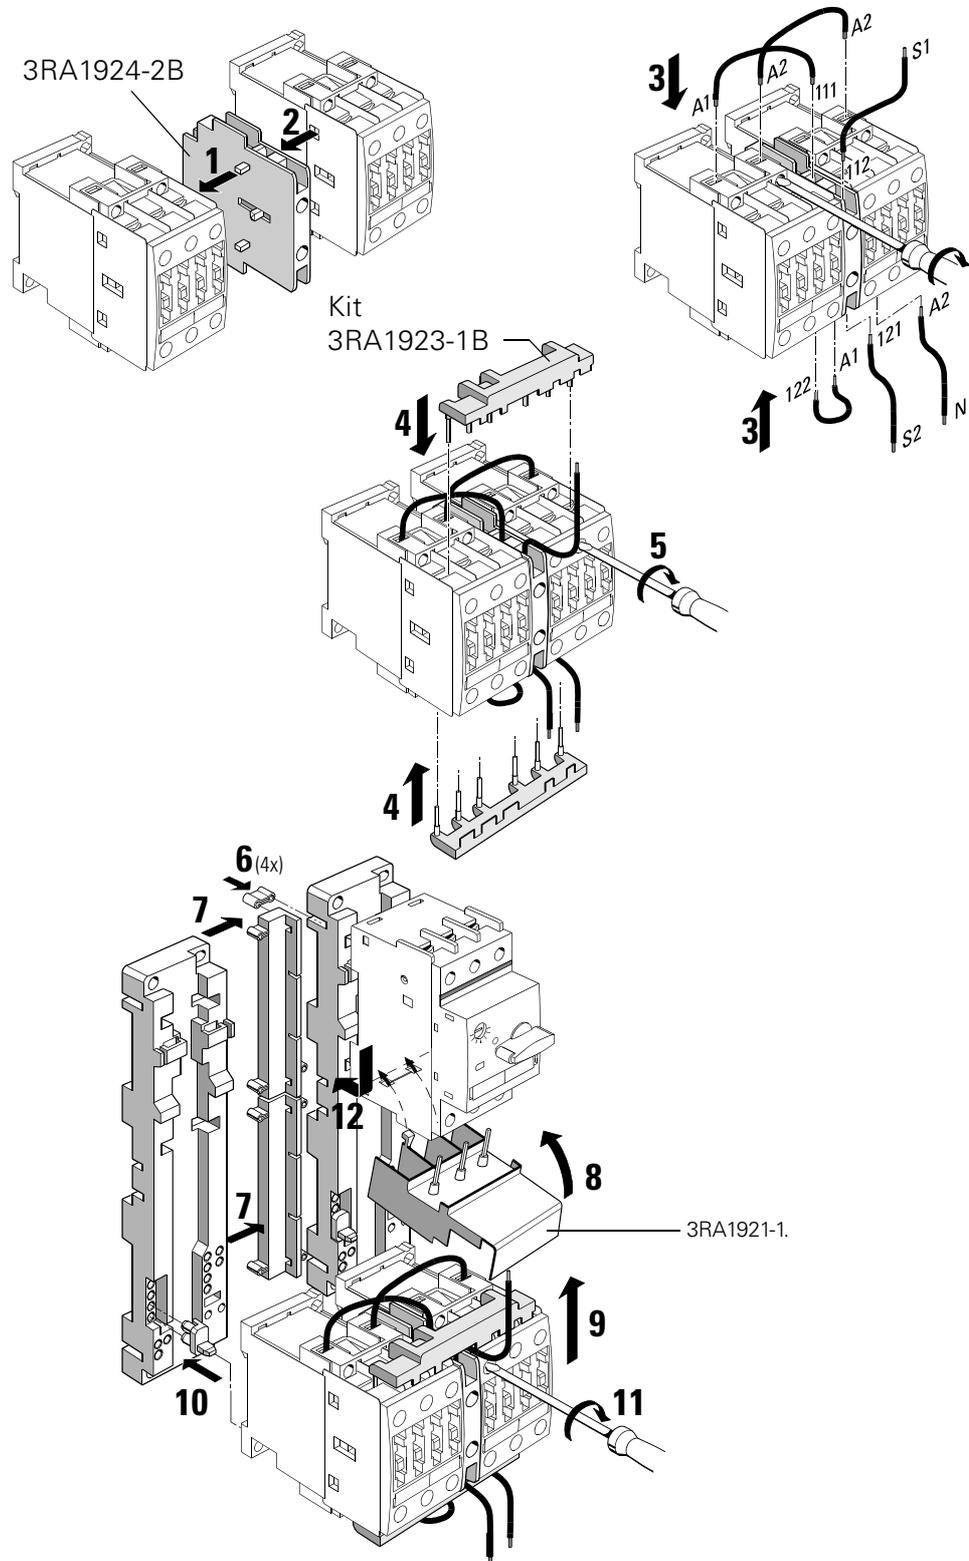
Self-assembly, rail, reversing operation (frame size S0)
